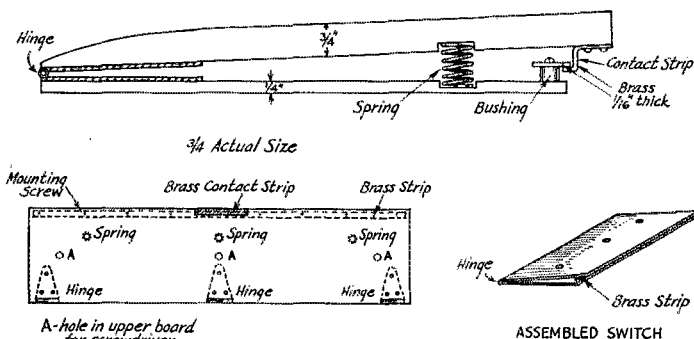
GENERAL PLAN OF THE "FOOT SWITCH" BARRIER
